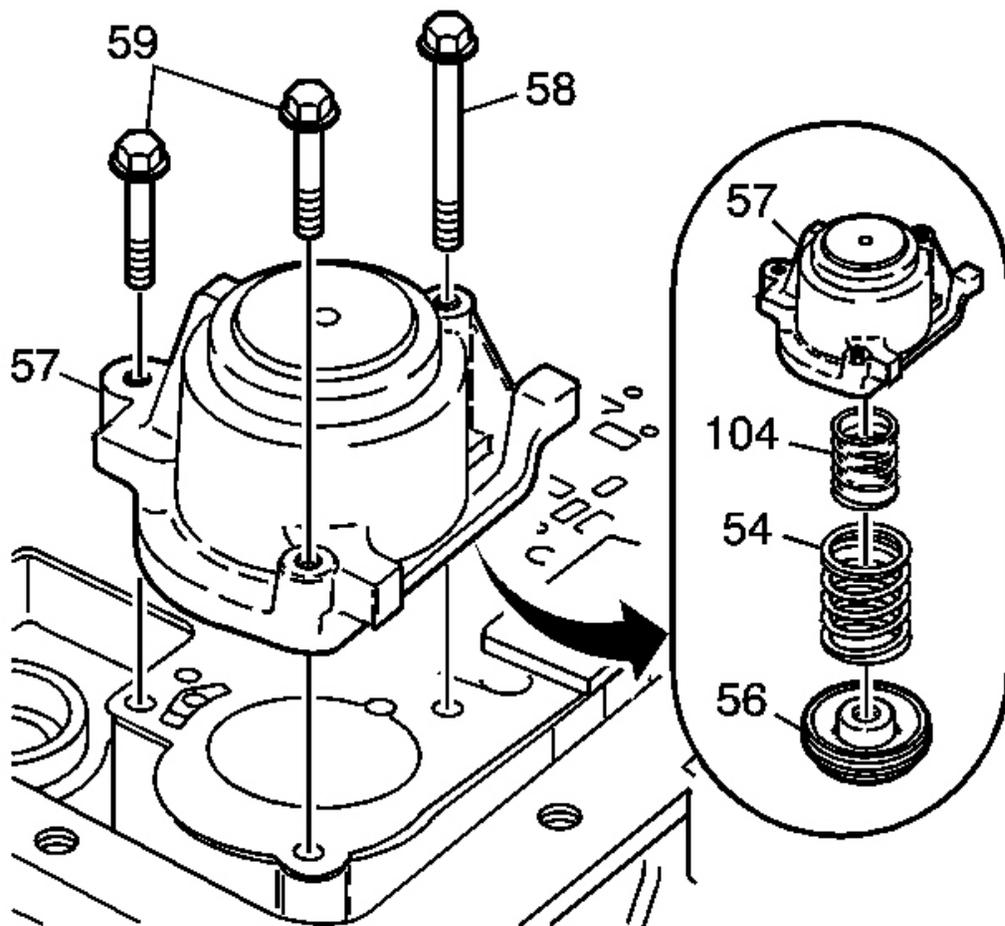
Removing Accumulator Cover Bolts & Pin Assembly
